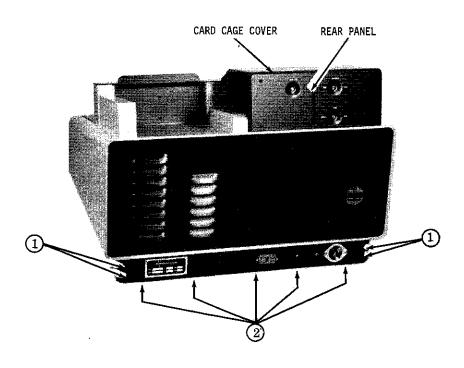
Removal of Rear Subframe Panel, Main Card Cage Cover and Panel
